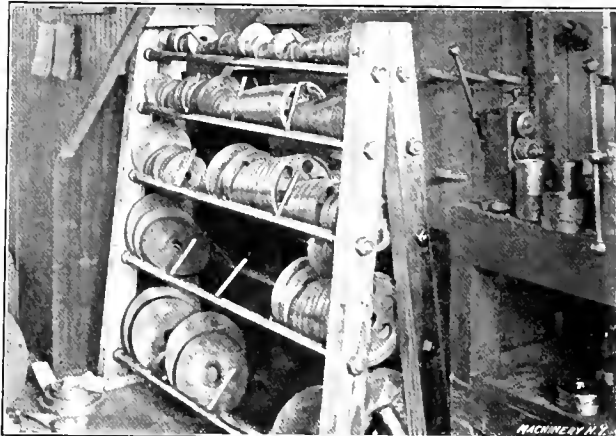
Disks of Various Sizes for Setting Gear Cutters to Depth
